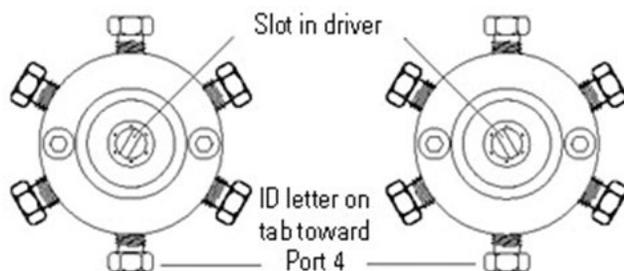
C6 W valve with preload and rotor removed (preload end view)
